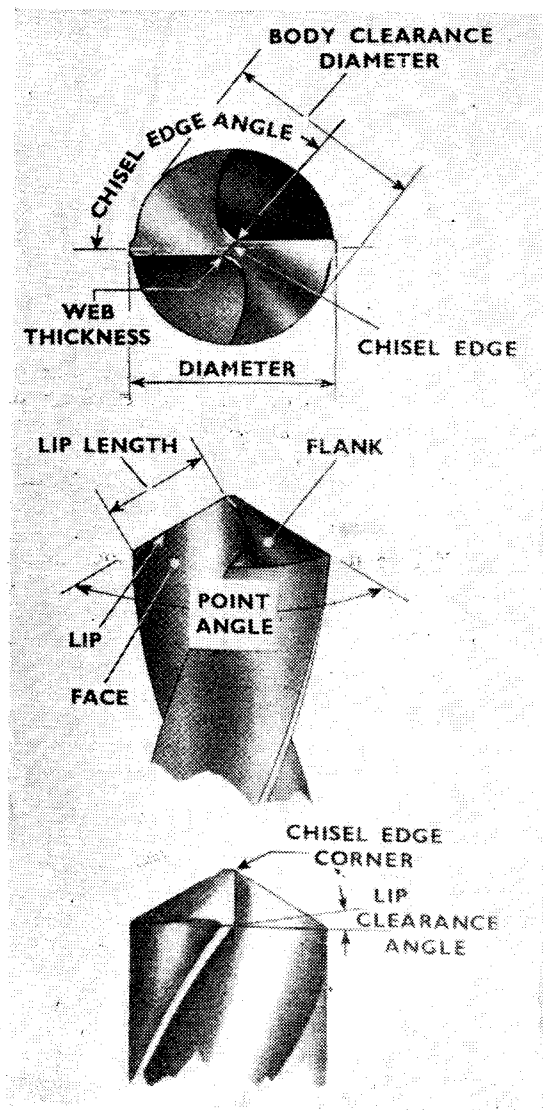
Components of the twist drill point (Courtesy of the English Steel Corporation)
